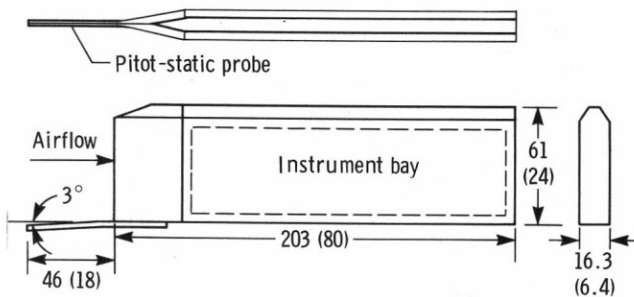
Flight test fixture with wedge forebody shape. Dimensions in centimeters (inches).
